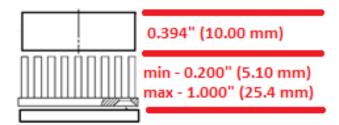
UltraZed-EG SOM Fan and Heatsink Vertical Dimensions
